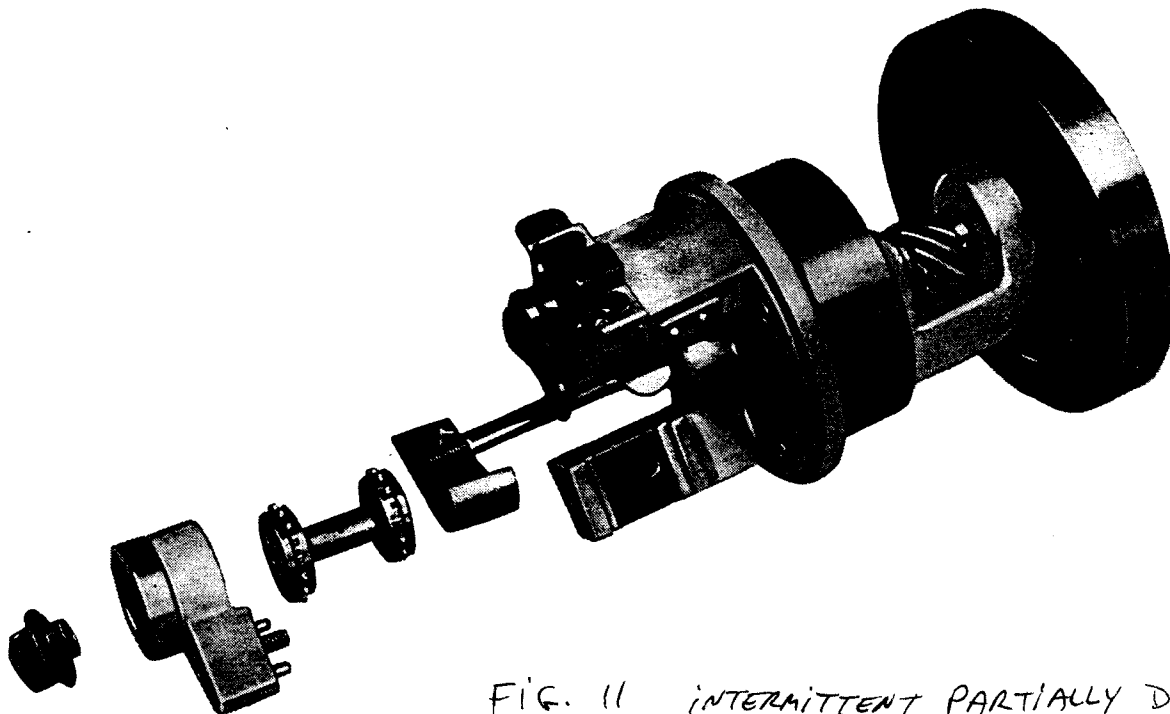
INTERMITTENT PARTIALLY DISASSEMBLED
